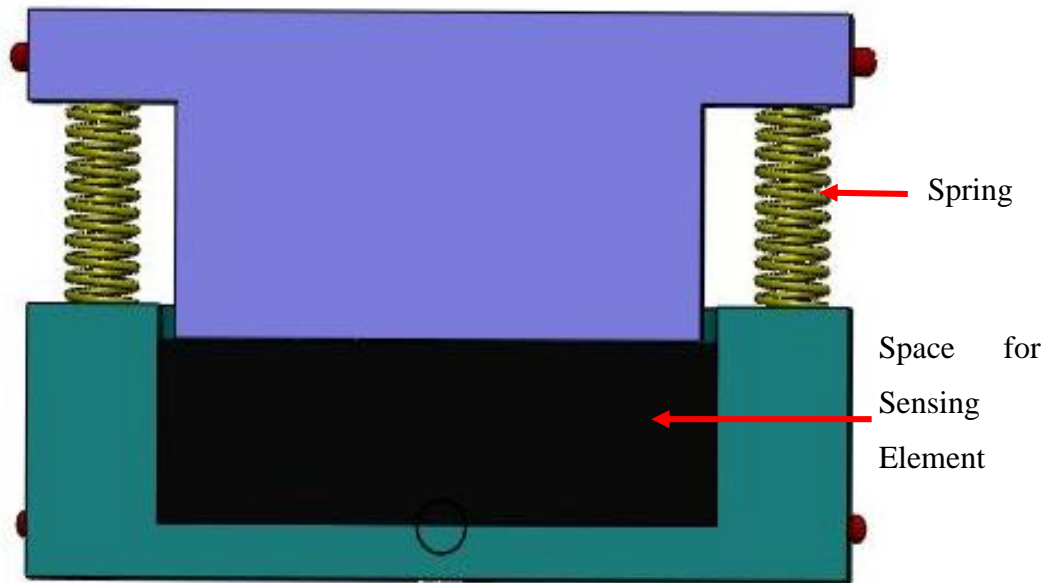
Sectional Front elevation conceptual design of structural design 1 and component assembly
